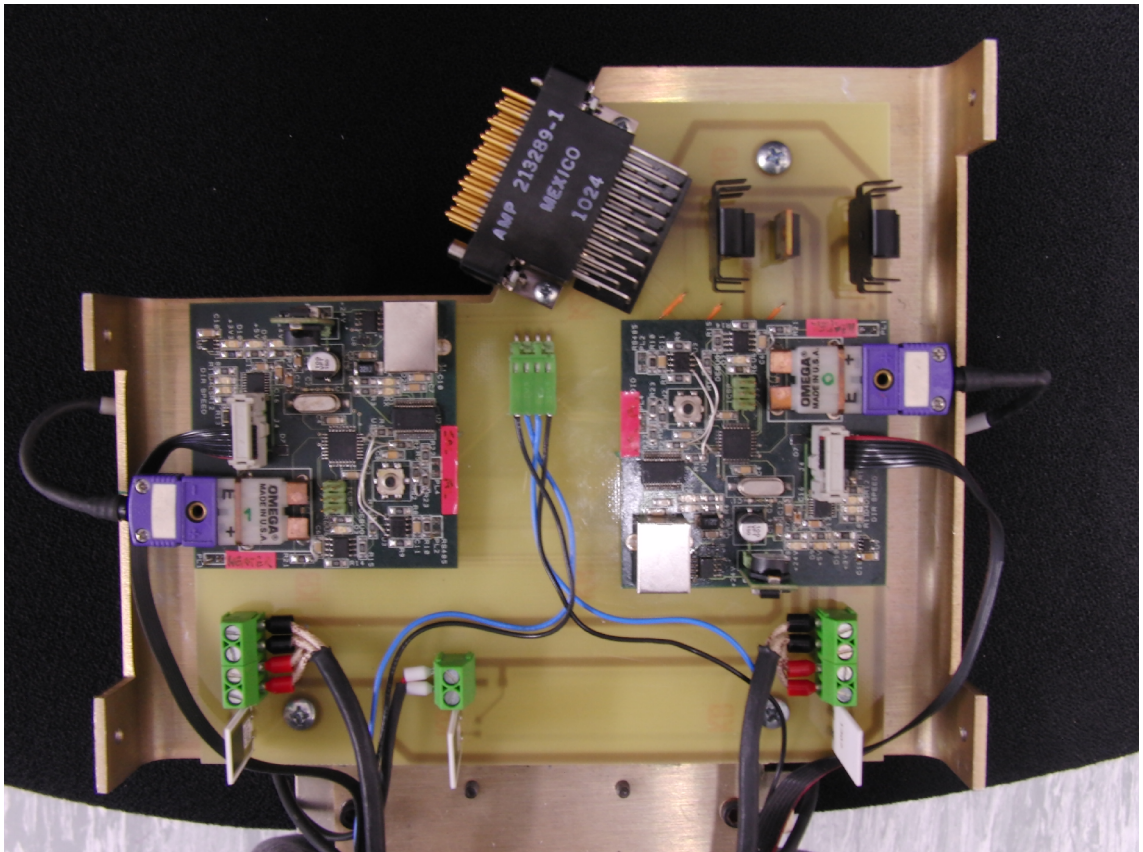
MotherBoard with Extruder Daughter Boards Fitted
